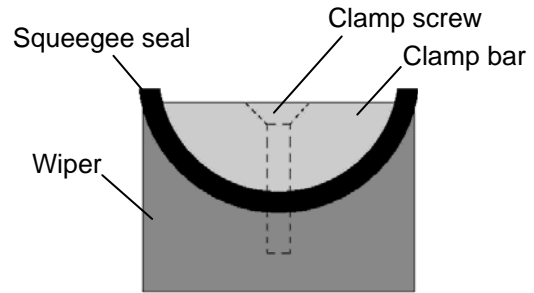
Cross-section drawing of the wiper with the squeegee seal.
